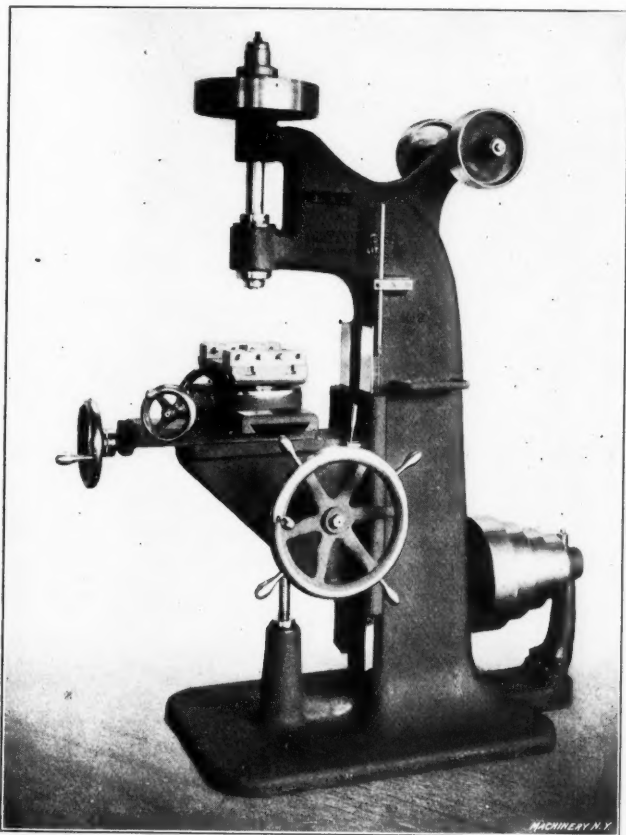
The Pratt & Whitney No. 2 Die-sinking Machine
